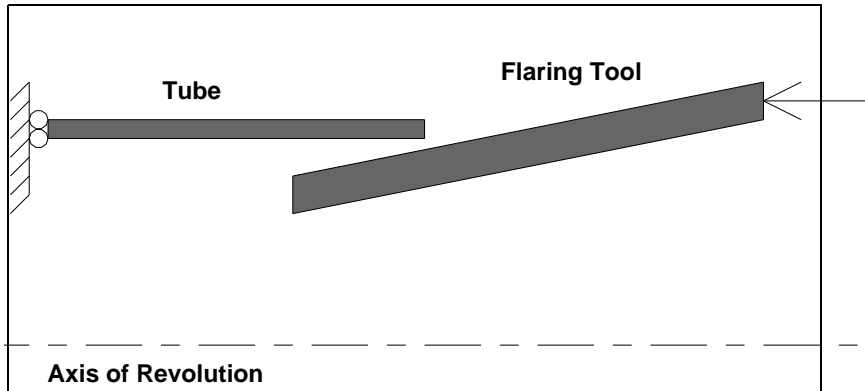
Axisymmetric Model of Tube and Flaring Tool
